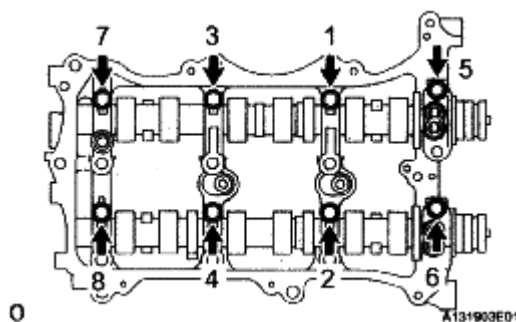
Identifying Camshaft Bolts Tightening Sequence
